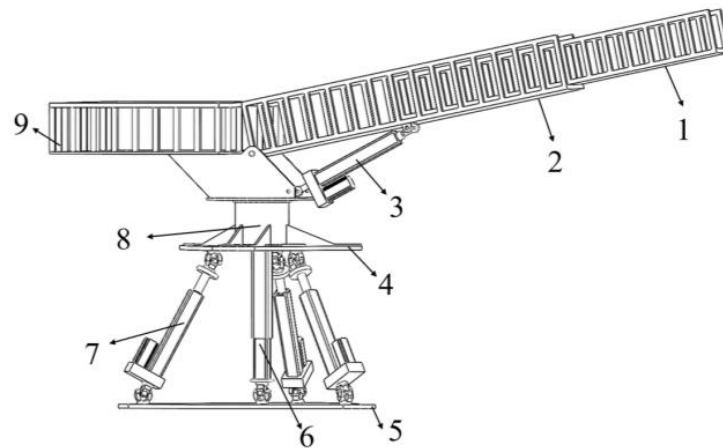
Structural components of the offshore gangway: 1—telescopic arm; 2—main arm; 3—pitching motor; 4—fixed platform; 5—moving platform; 6—follower branch chain; 7—drive support chains; 8—slewing mechanism; 9—transfer platform.
